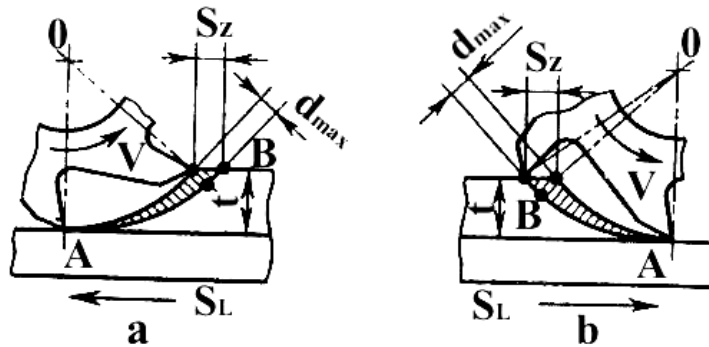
Conventional (up) (a) and climb (down) (b) milling: thick-ness of removed metal;  $d_{max}$  – maximum chip thickness;  $S_z$  – feed motion on one tooth of cutter
